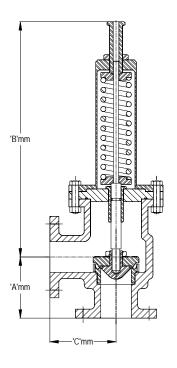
Spring Loaded Relief Valve is available with right angle or globe type body and flanged connections.
